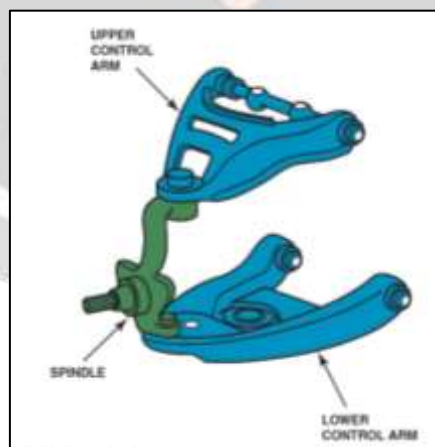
The spindle supports the wheels and attaches to the control arm with ball-and-socket joints called ball joints.
